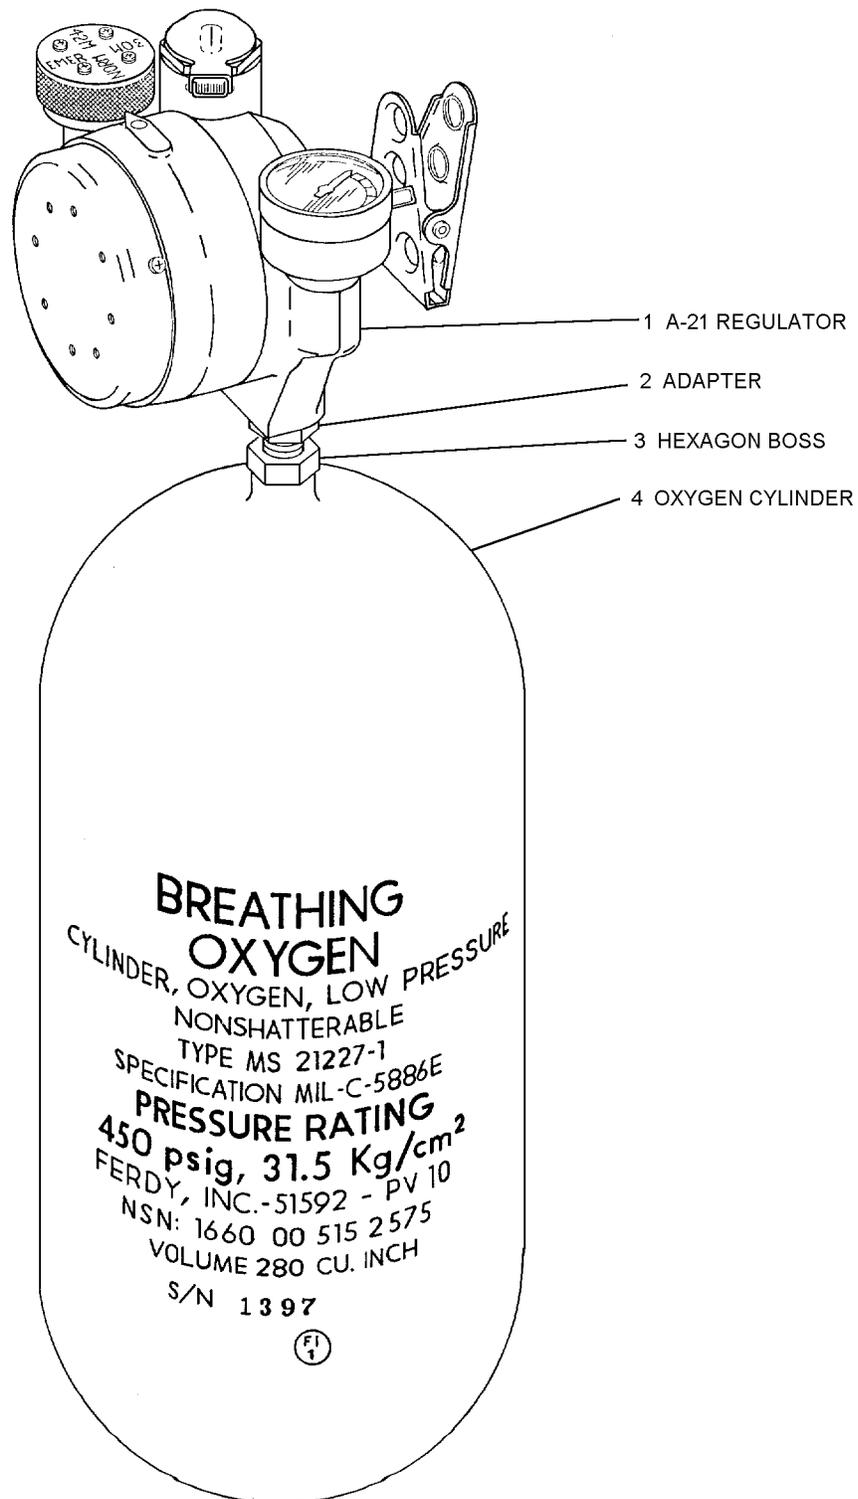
Type MA-1 Portable Breathing Oxygen Cylinder and Regulator
